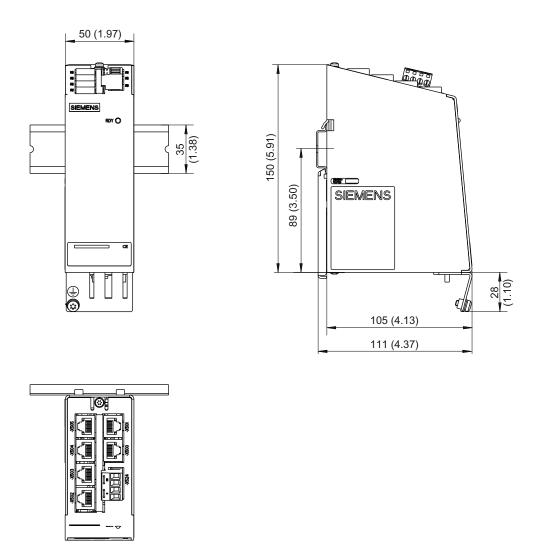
Dimension drawing of the DRIVE-CLiQ Hub Module DMC20, all data in mm and (inches)
